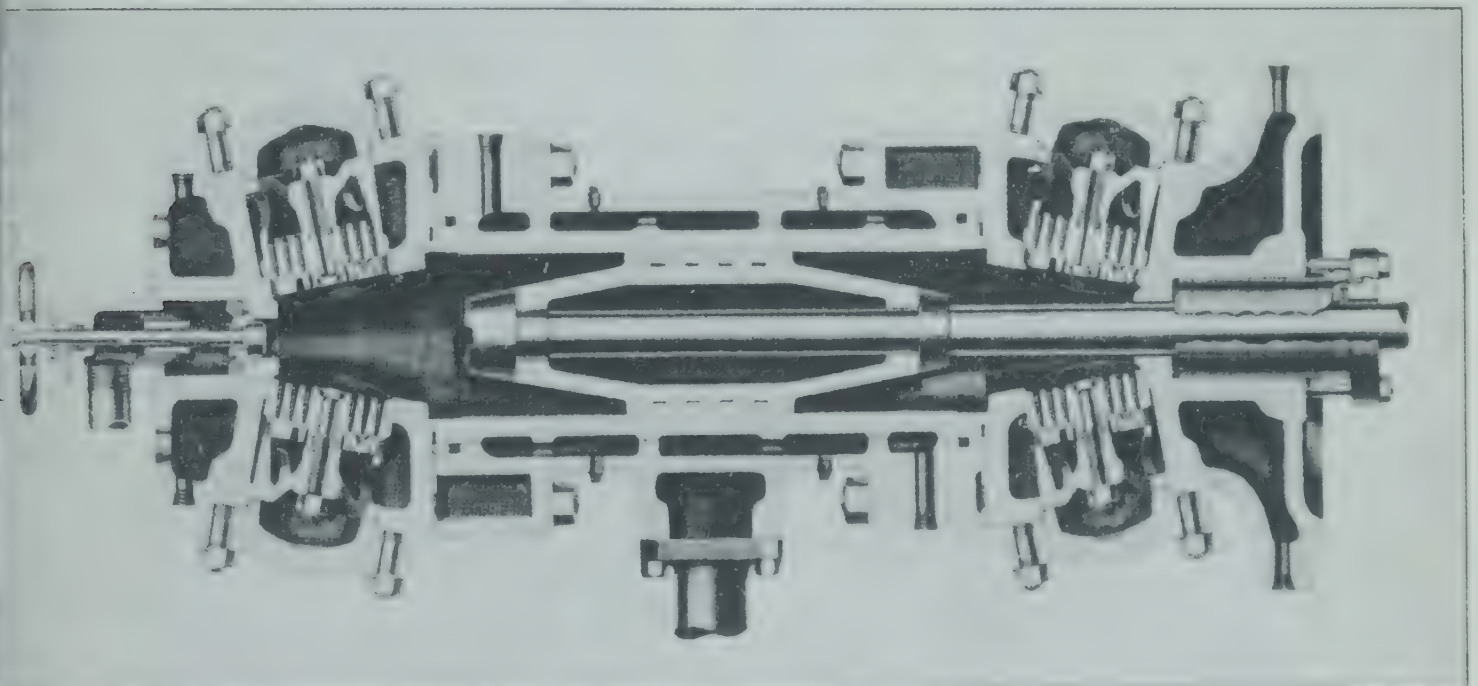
Cutaway view of compressor cylinder for pressures up to 2000 psi. (Cooper-Bessemer Corp.)
